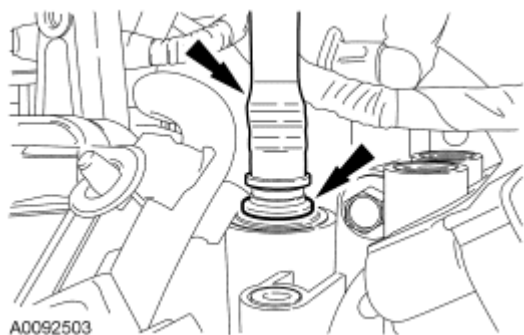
Locating Power Brake Booster Vacuum Tube And Quick Release Locking Ring
